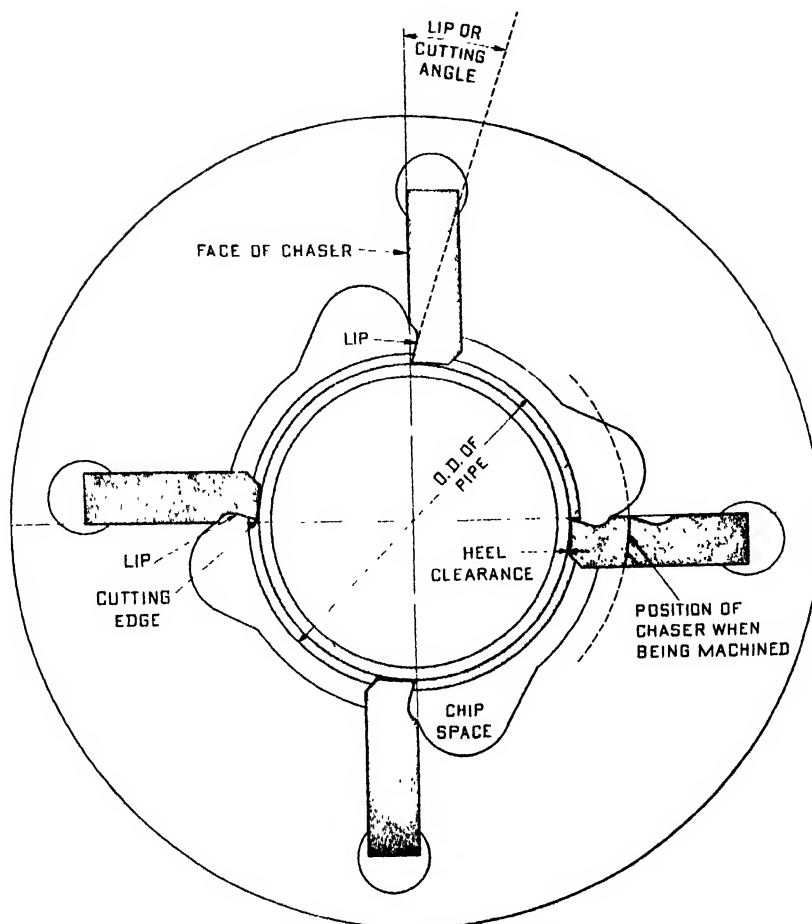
Threading die showing lip, lip angle, chip space, clearance and cutting edge.
